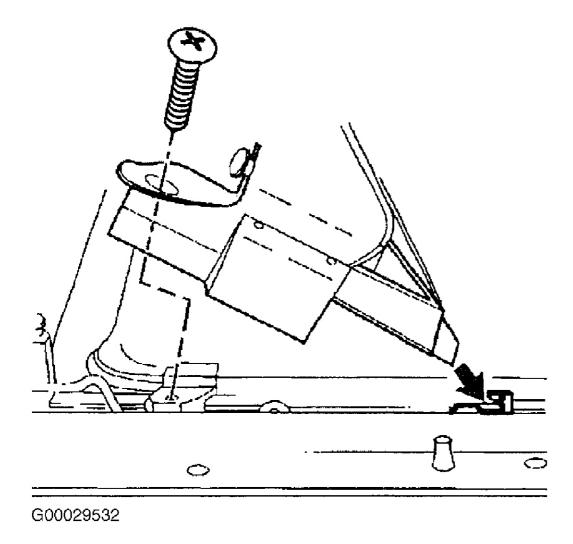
Removing & Installing Water Gutter Courtesy of GENERAL MOTORS CORP.
